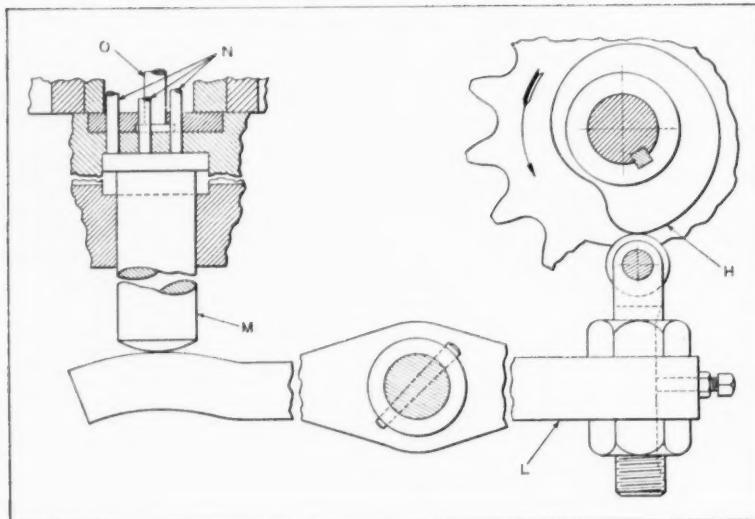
Work-ejecting Mechanism for Operating Lower Knock-out of Die Shown in Fig. 2
